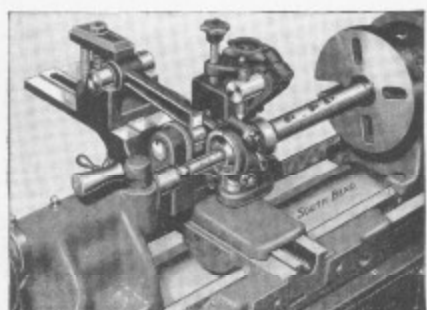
Boring, Facing and Filleting a Rebabbed Connecting Rod in the Lathe.
